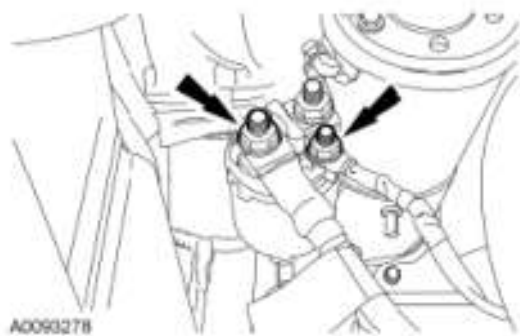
Locating Transmission Insulator And Retainer Crossmember Nuts
